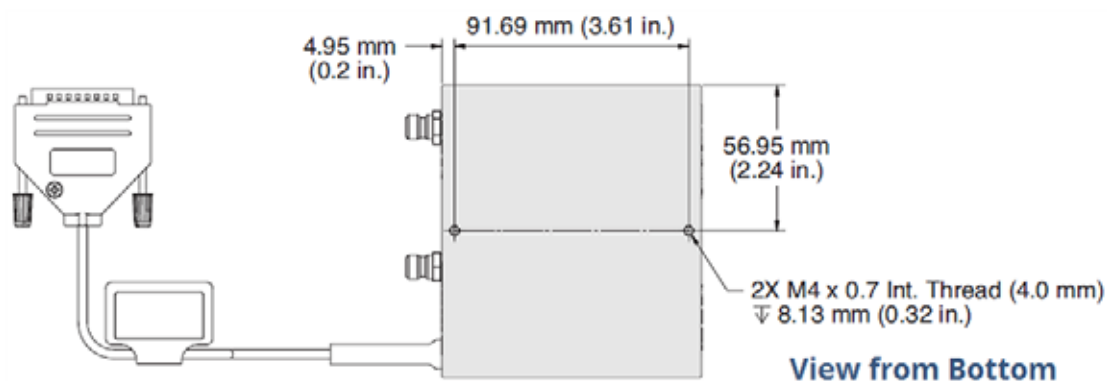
Dimensions – Mounting Features (View from Bottom of Sensor)
